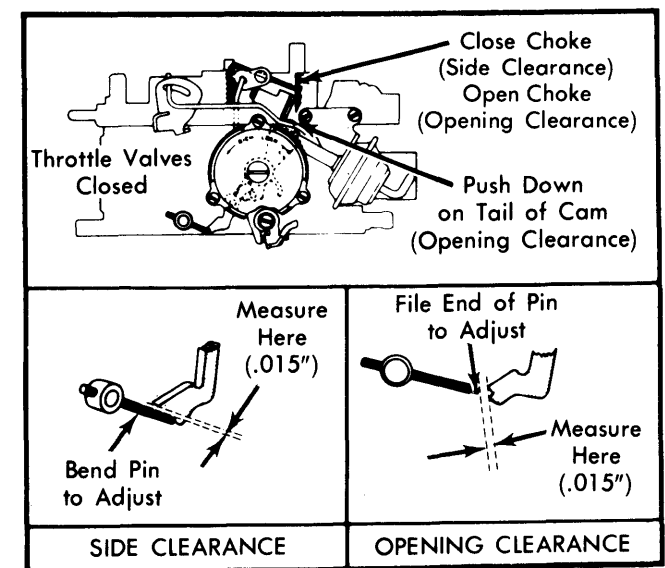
Adjusting Secondary Throttle Valve Lockout
